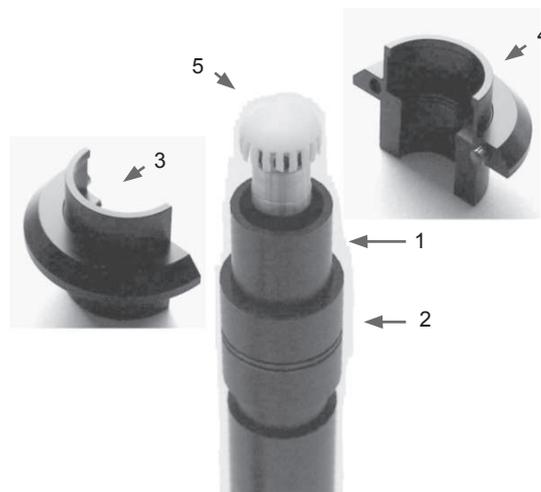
Mounting the Adapter RA0009/RA0041
